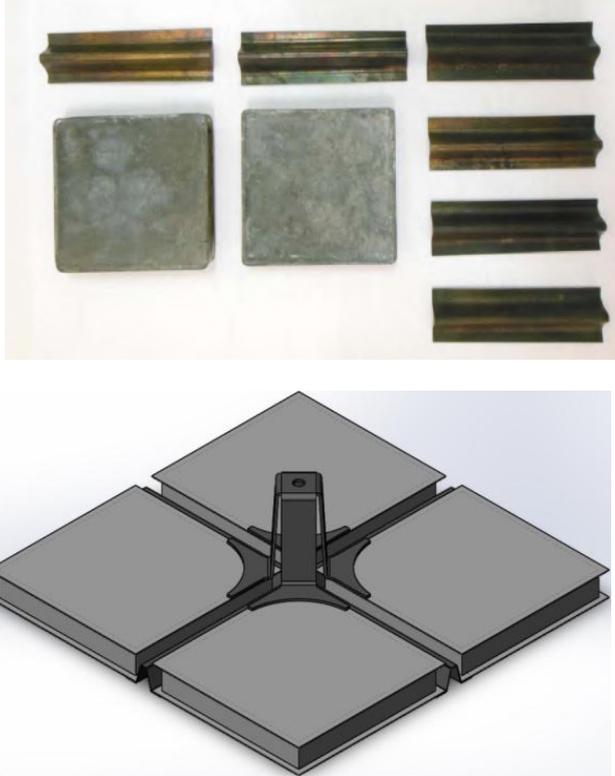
The unit that is exposed to soldering in a vacuum and its calculation scheme
